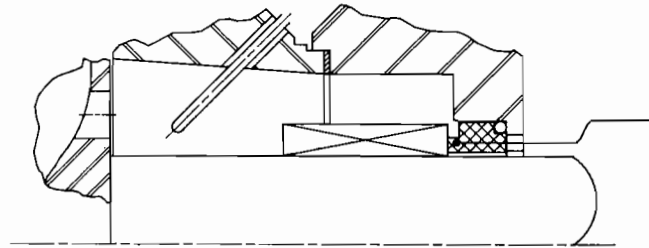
Enlarged Tapered Seal Chamber, Pump B.
